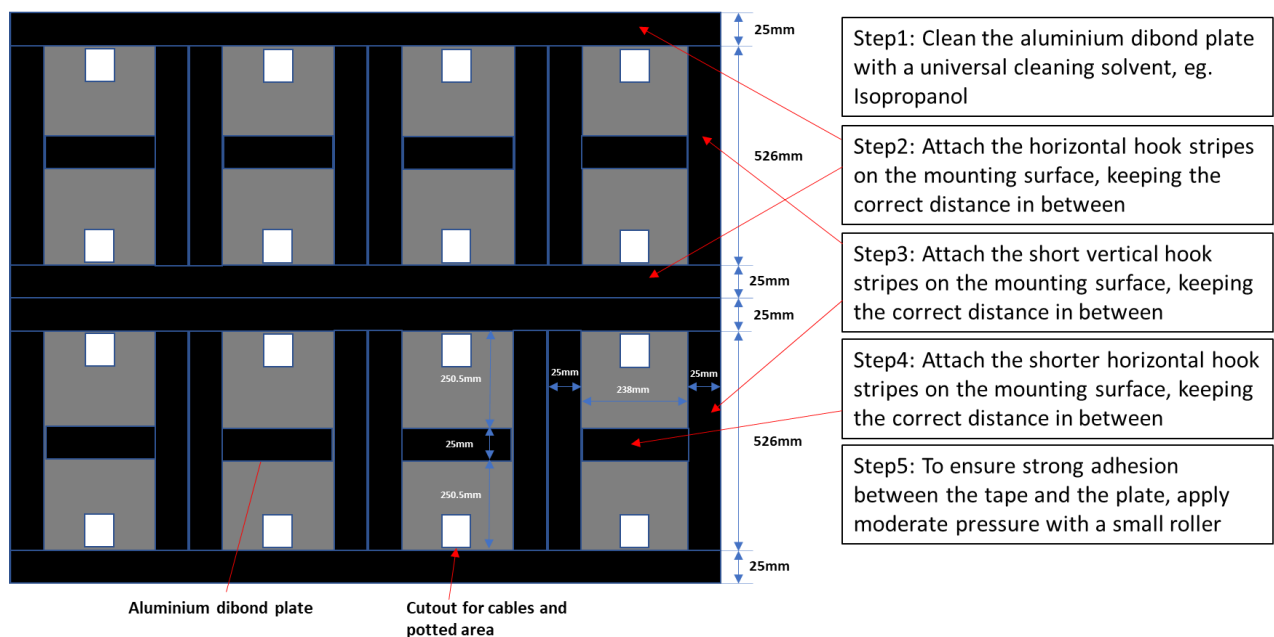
Installation of self-adhesive hook tape on aluminium dibond plate for mounting ledTec.flex banner
